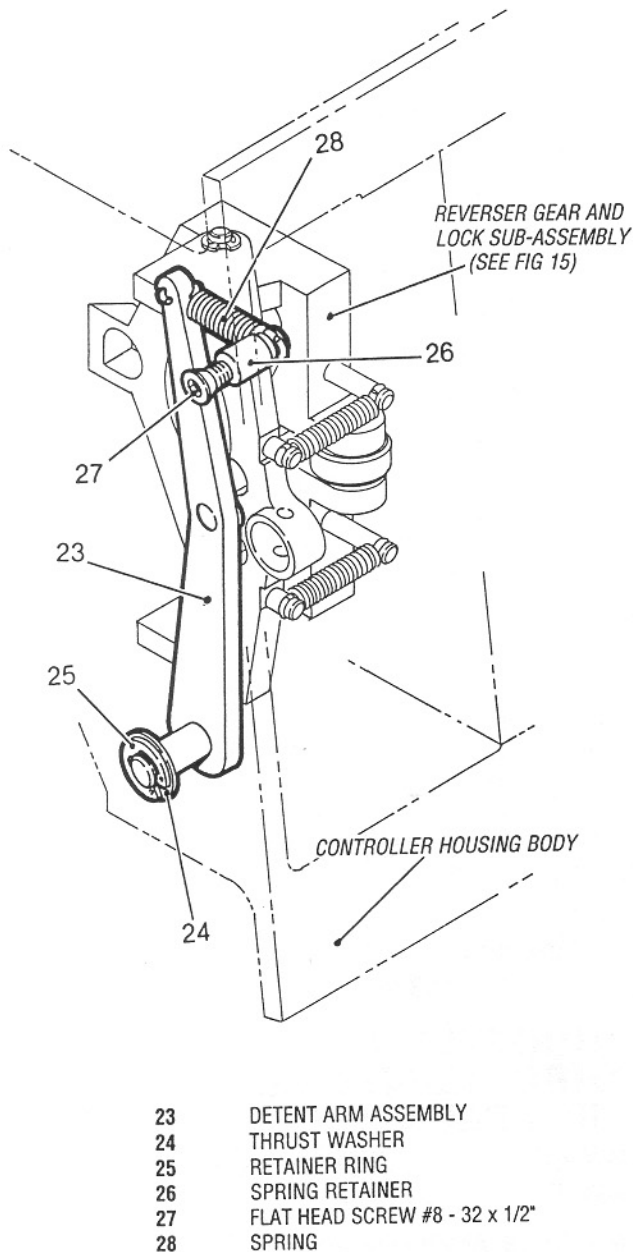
Reverser Detent Arm Removal (D.B. and Non D.B. Types)
